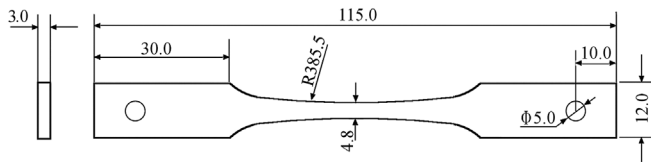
Geometry of a tensile specimen used for continuous cooling tests on Gleeble3500 (dimensions in mm).
